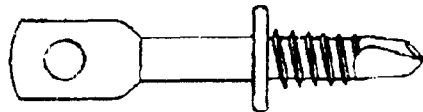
FASTENER TYPE AND IDENTIFICATION
